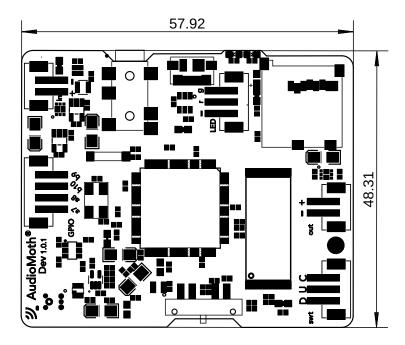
Mechanical drawing of AudioMoth Dev showing dimensions in milimeters
